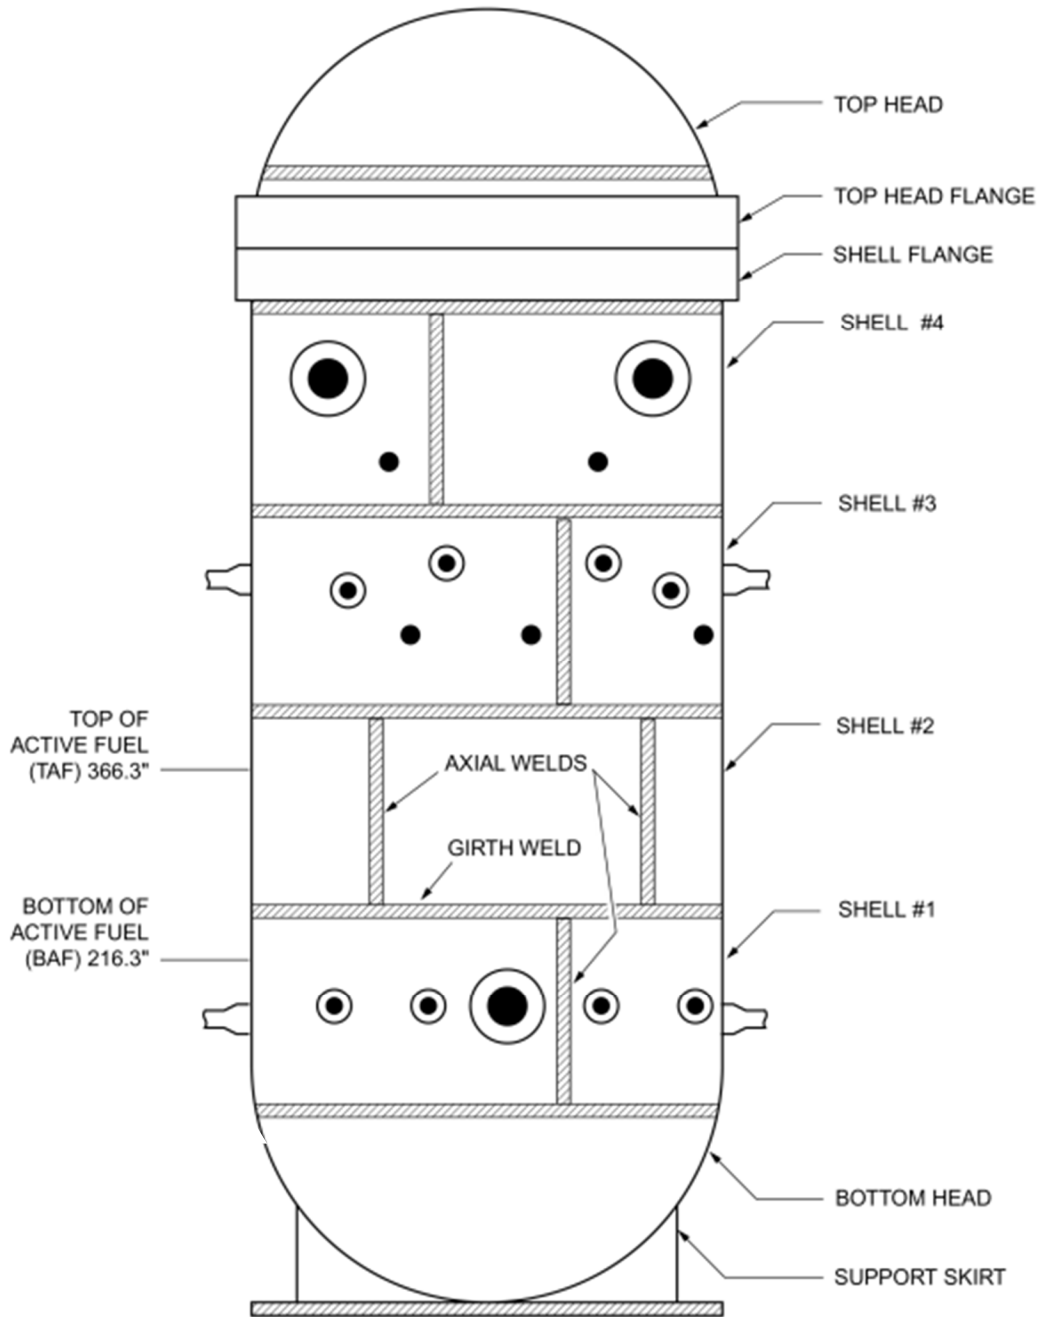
Schematic of the Fermi 2 RPV Showing Arrangement of Vessel Plates and Welds
